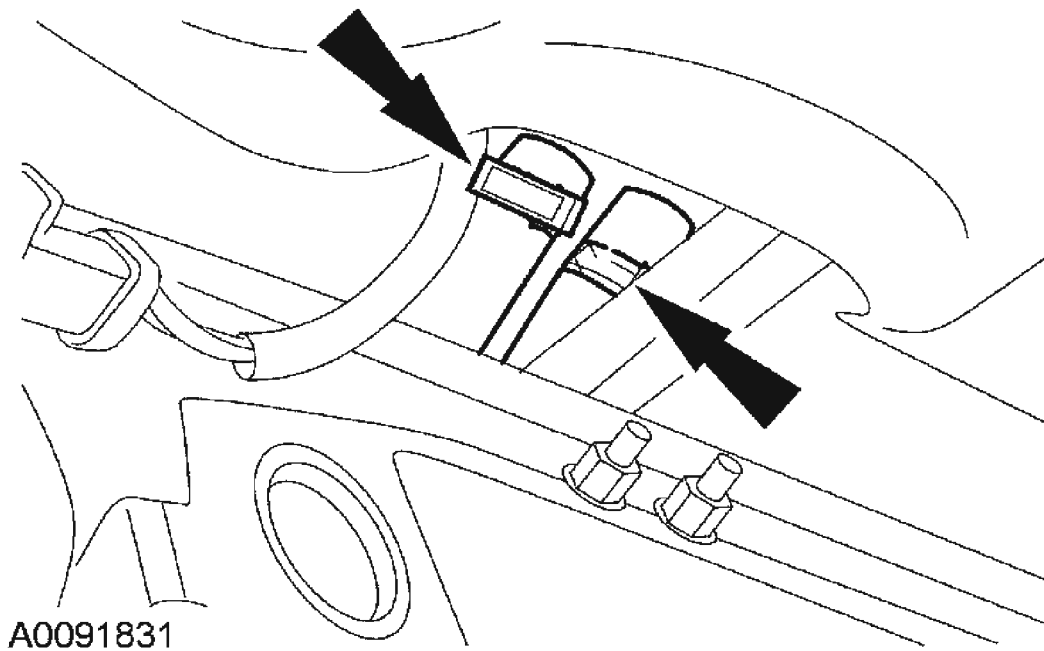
Clamping Off And Disconnecting Coolant Hoses From Heater Core
